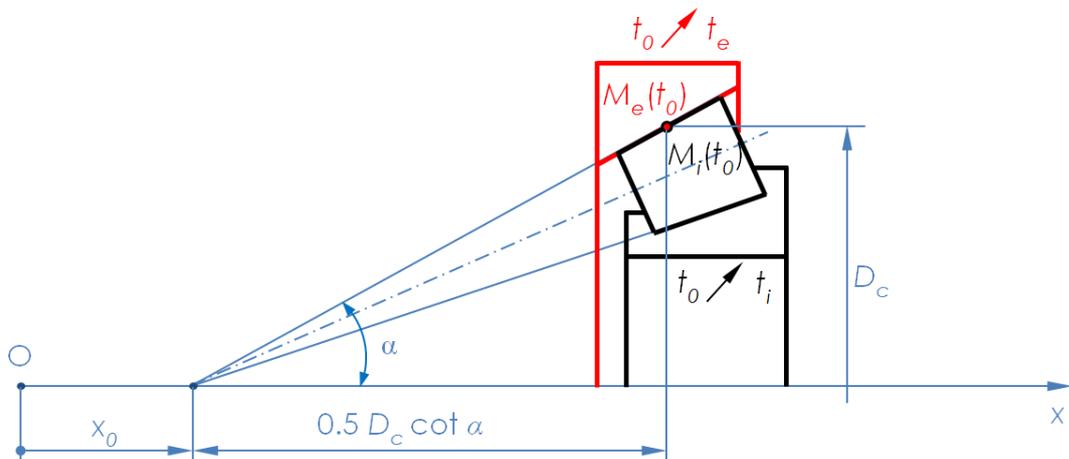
Tapered roller bearing with zero mounting clearance before heating
